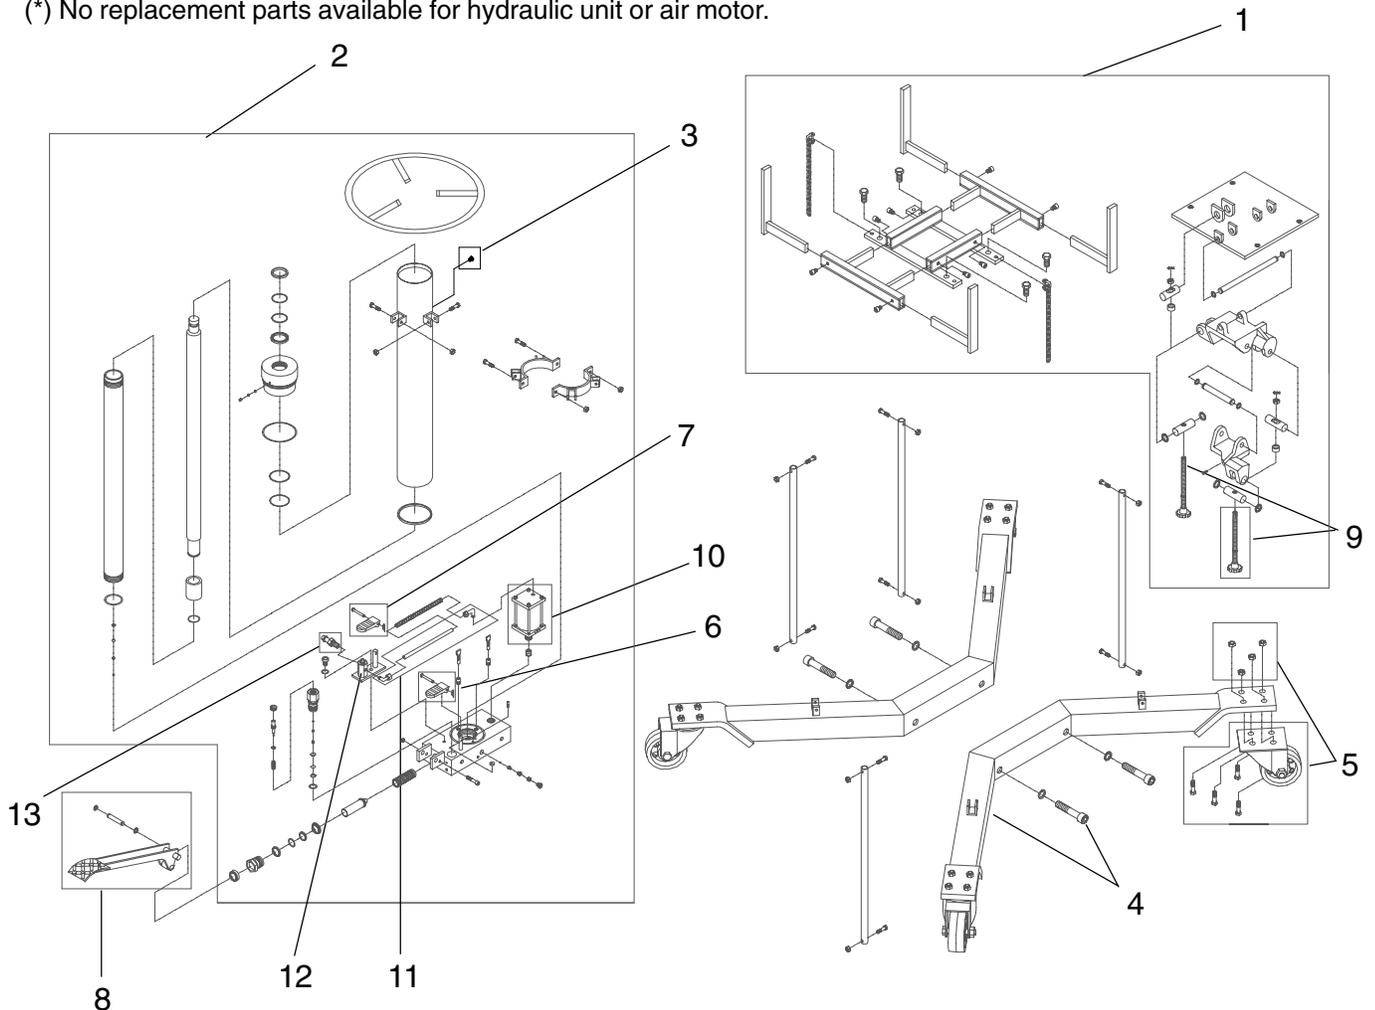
Replacement Parts Illustration for Model No. AH-26576
